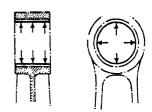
Showing points to check master rod gudgeon pin bush bore.
